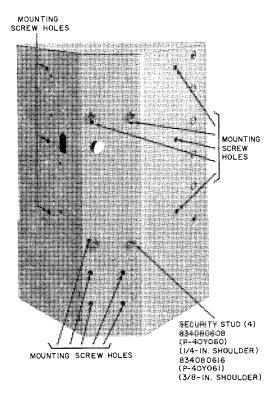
Location of Mounting Screw Holes and Security Studs in 2-Type Set
